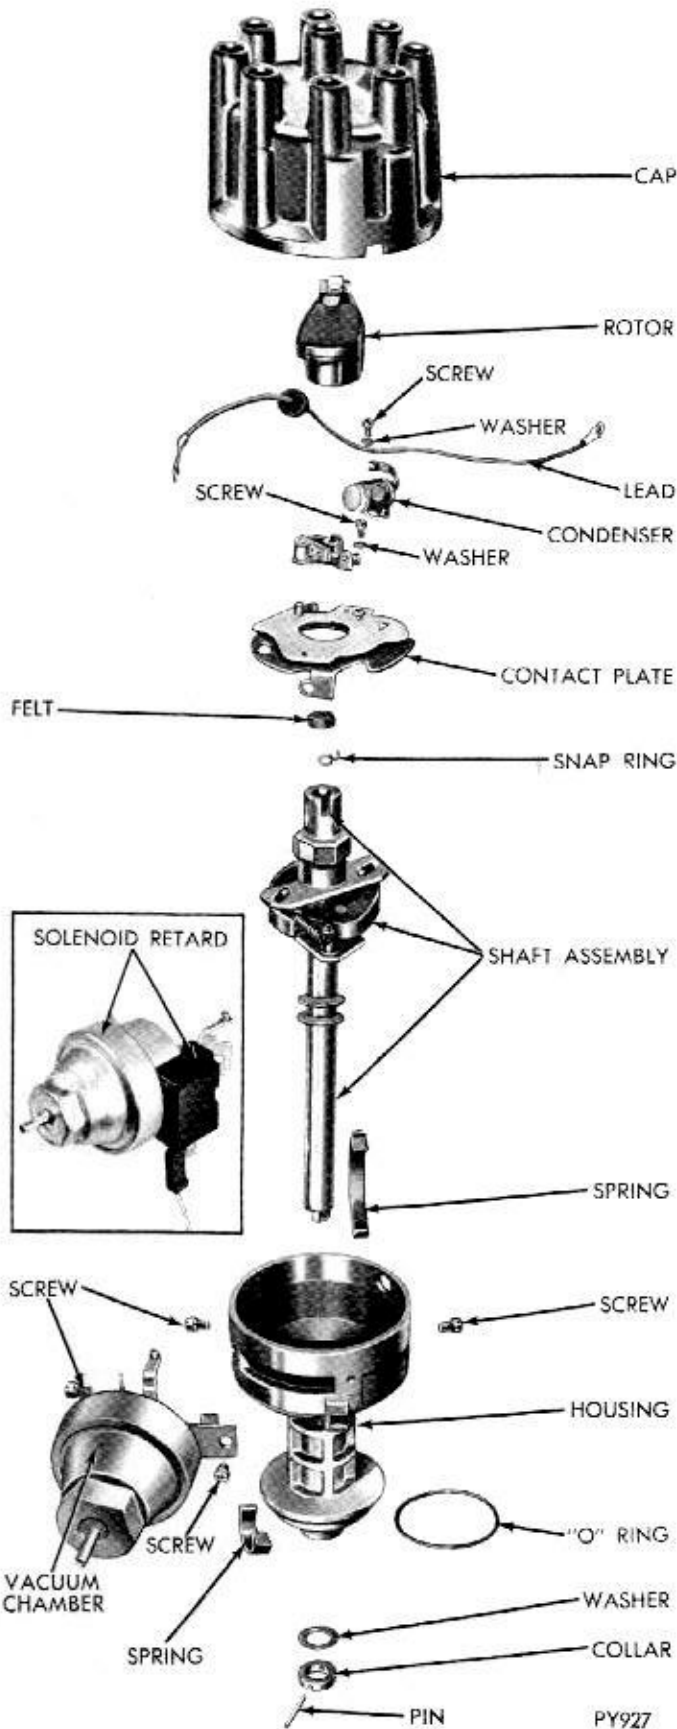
Distributor (Disassembled View)—Chrysler Built (Typical)
